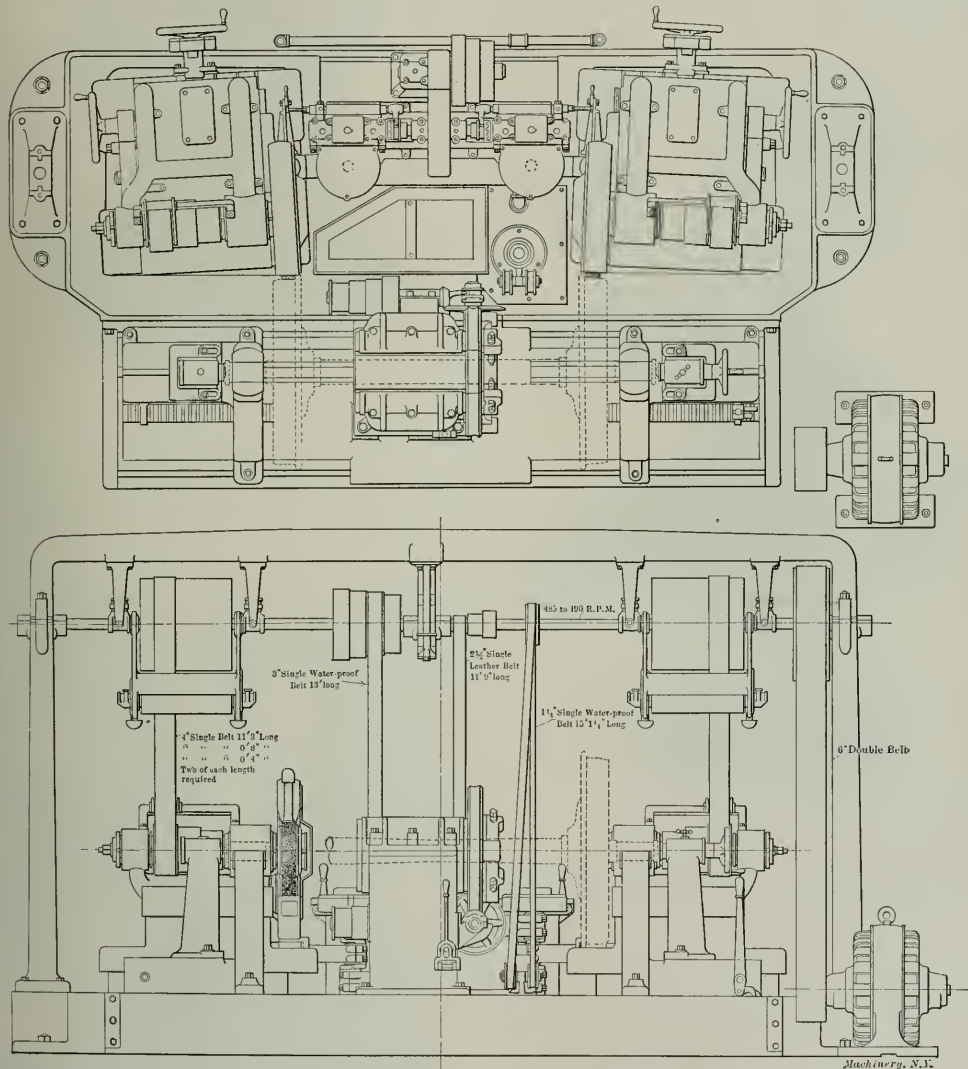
Plan and Elevation of Norton Car Wheel Grinder.
